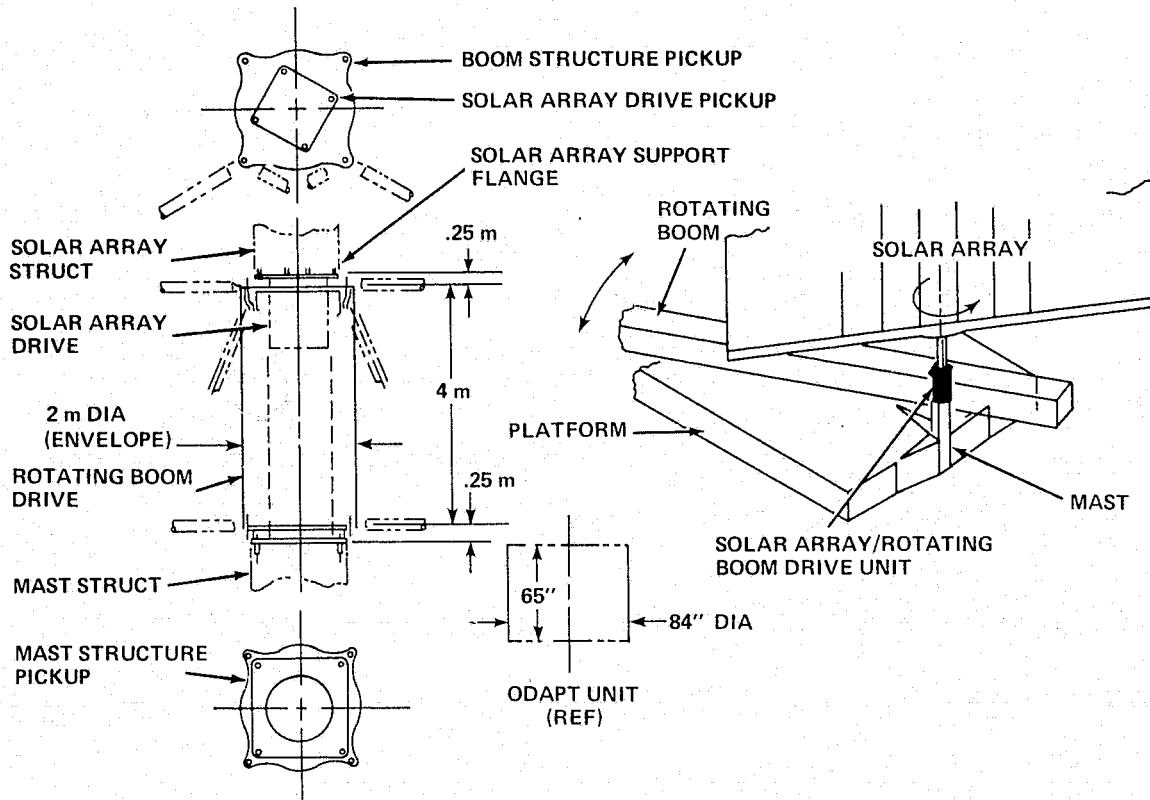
OCDA Solar Array/Rotating Boom Drive Unit
